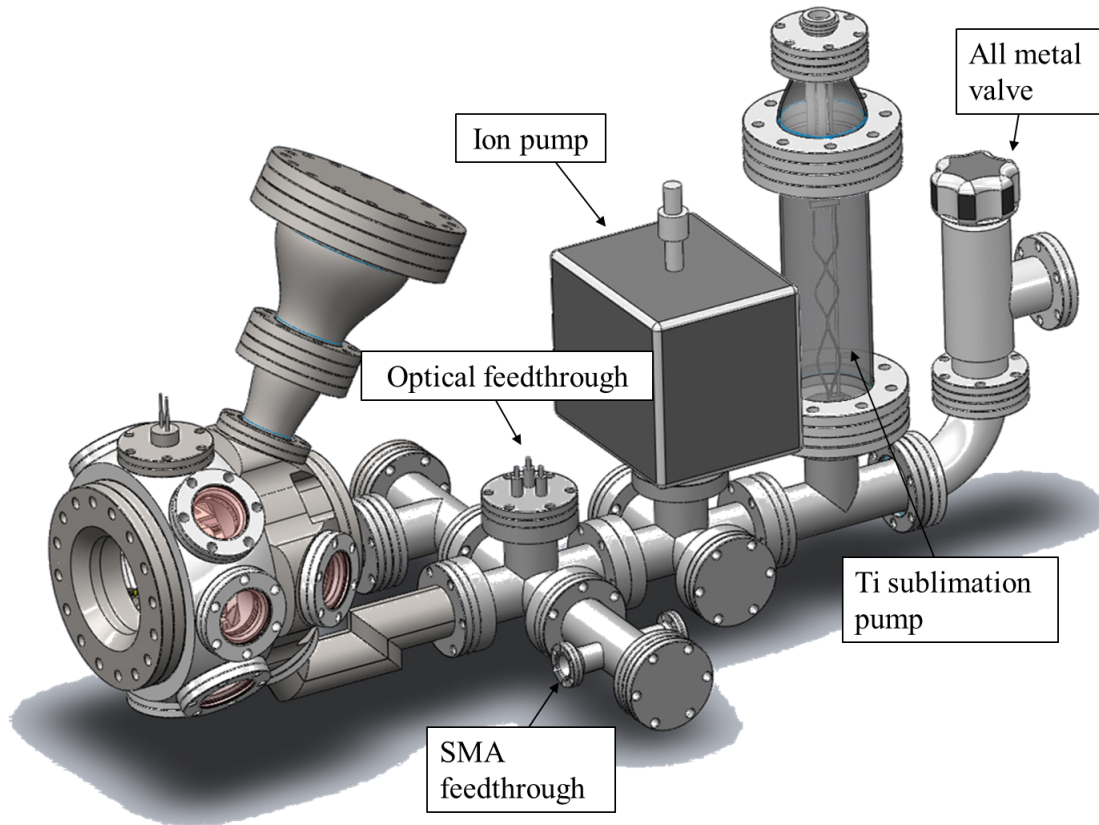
SolidWorks drawing of the whole vacuum system assembly.
